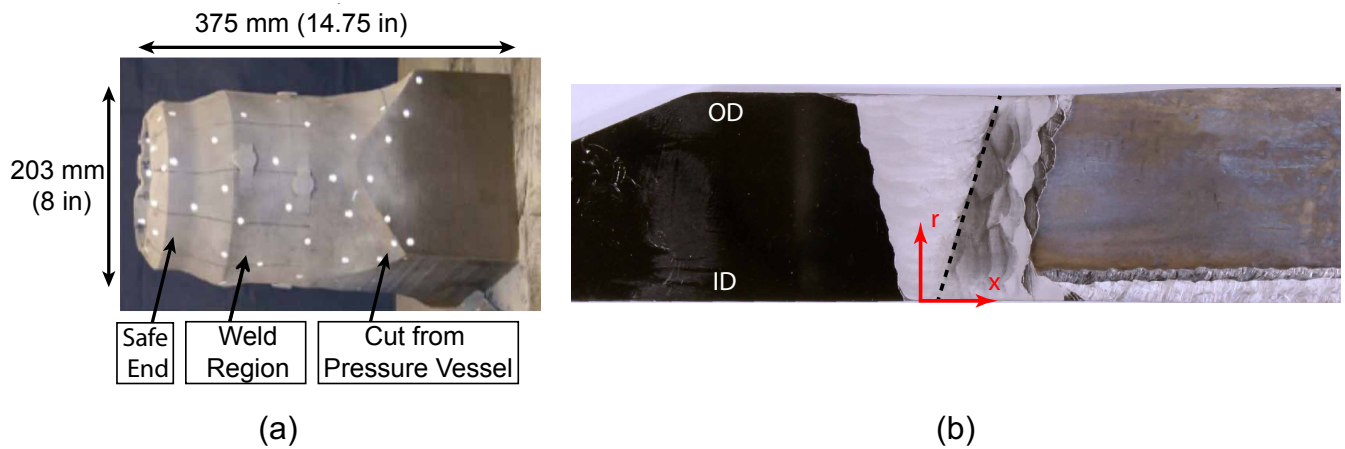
(a) Full nozzle geometry and (b) etched nozzle cross-section with coordinate system. The materials in (b) from left to right are stainless steel, Alloy 82/182 weld, Alloy 182 weld butter, and low-alloy steel
